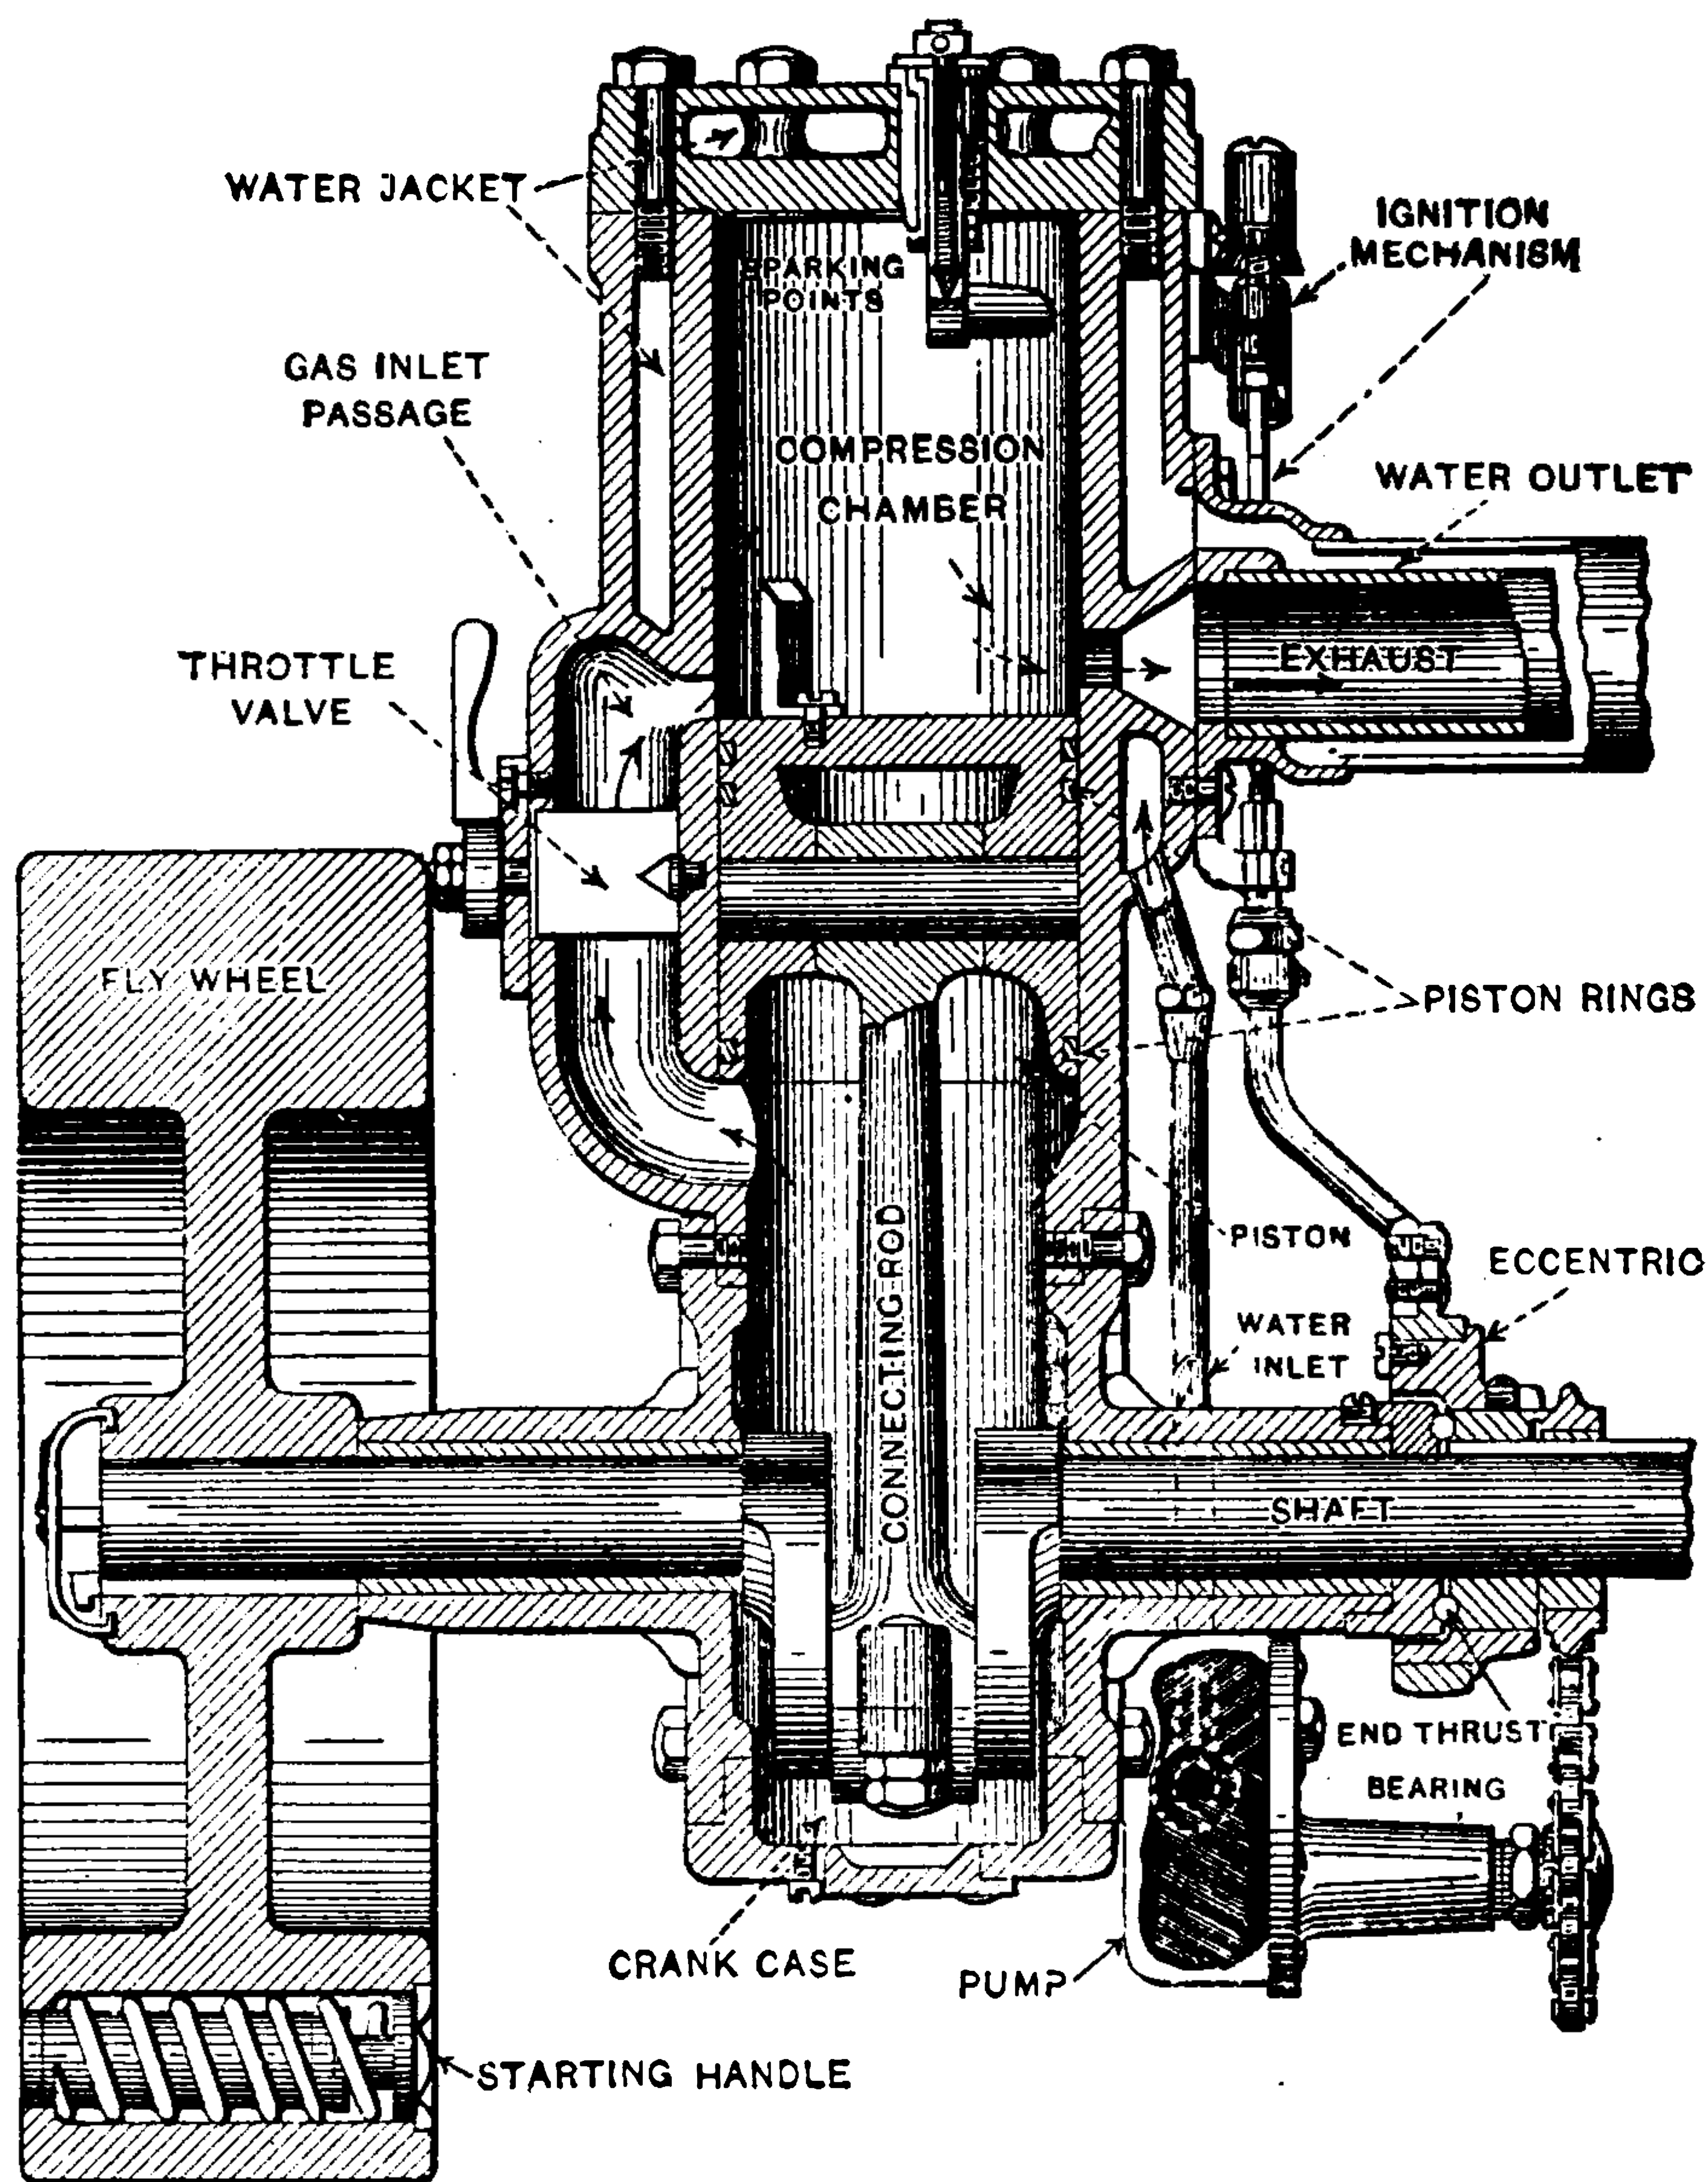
SECTIONAL DETAIL OF THE LOZIER MOTOR.
